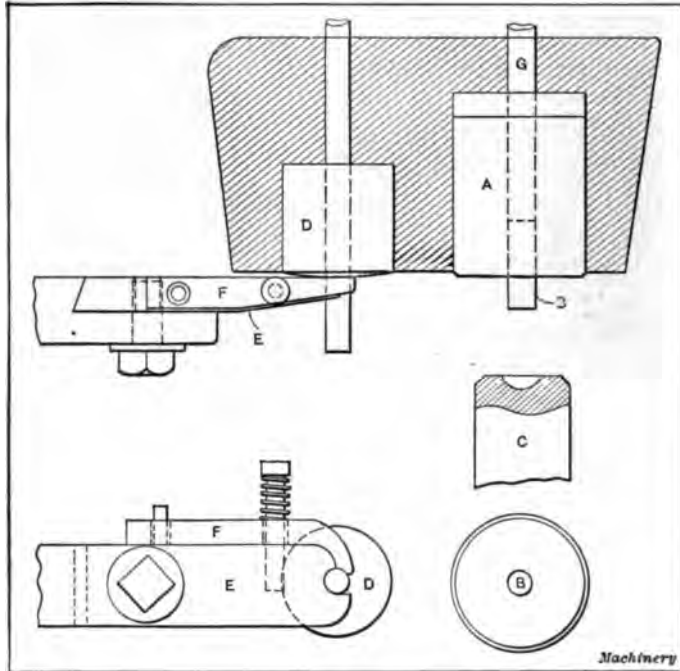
Section of Cold-header showing Locations of Principal Tools
